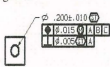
Statistical Dimension And Geometric Tolerance Example
